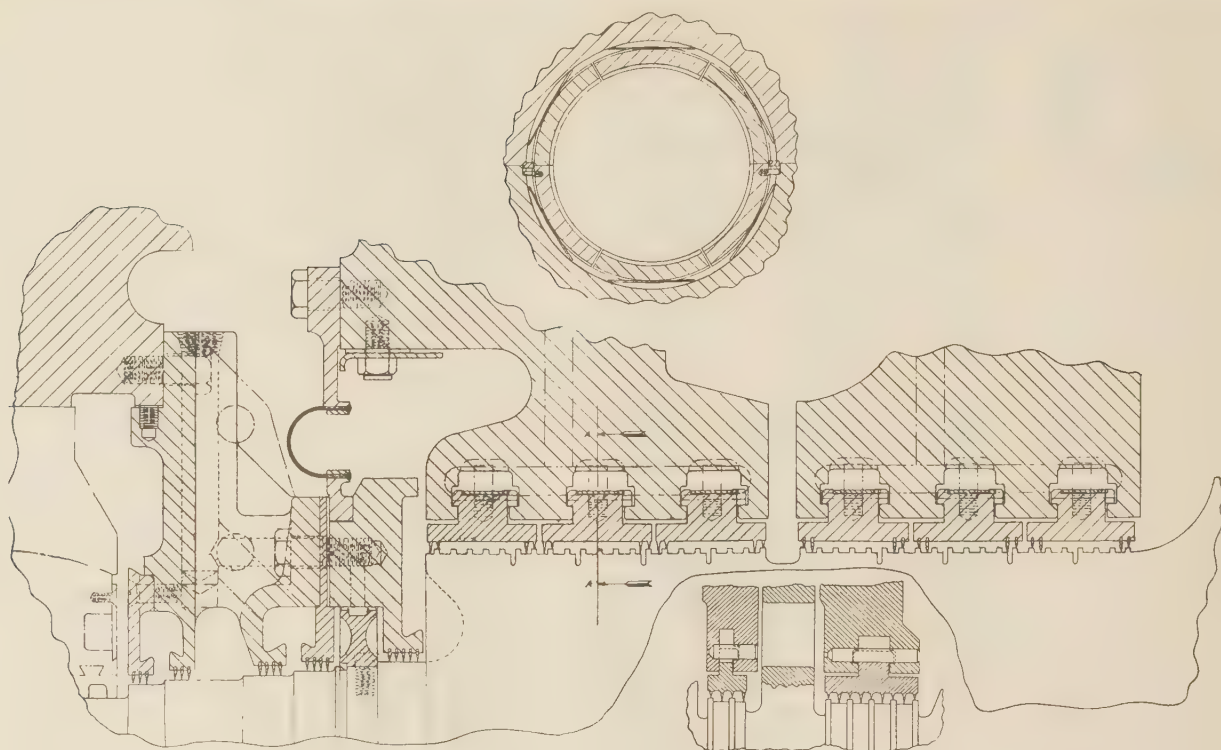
TYPICAL HIGH-PRESSURE SHAFT AND DIAPHRAGM PACKINGS
